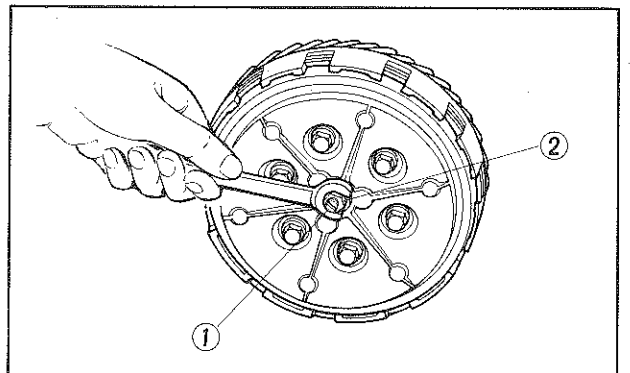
(1) Adjusting screw (2) Flanged nut
